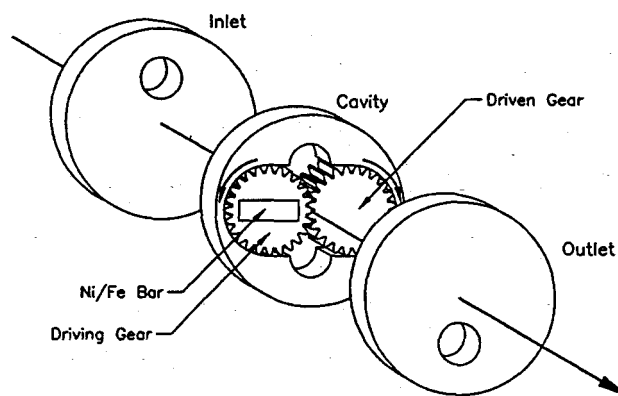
An exploded view of the gear pump. The inlet, outlet, cavity and gears are plastic fabricated using the SLIGA process. The pump gears are 24 tooth gears with a pitch diameter of 1.392 mm. The inlet and outlet ports are 0.696 mm in diameter. The driving gear contains an electroplated 0.3mmx1.0mm Ni/Fe bar for magnetic coupling.
